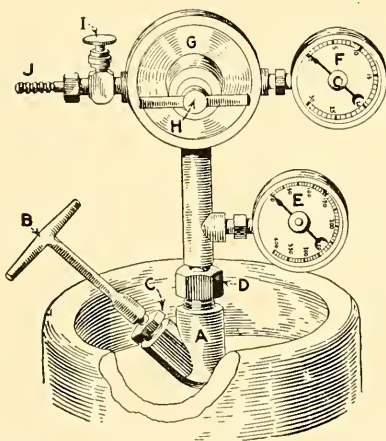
Prest-O-Lite Acetylene-Regulator Assembly.
